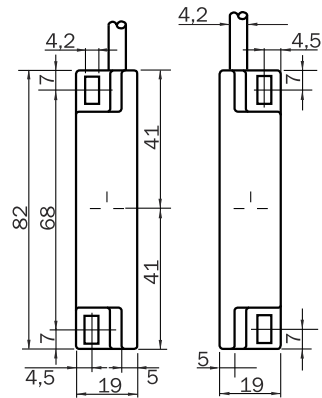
Dimensional drawing RE300-DA.. magnetic safety switch
